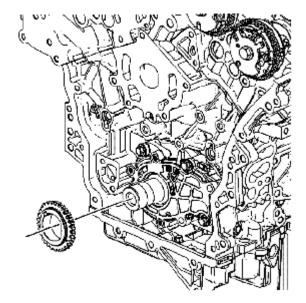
Identifying Left Camshaft Intermediate Drive Chain Idler And Bolt Courtesy of SUZUKI OF AMERICA CORP.
